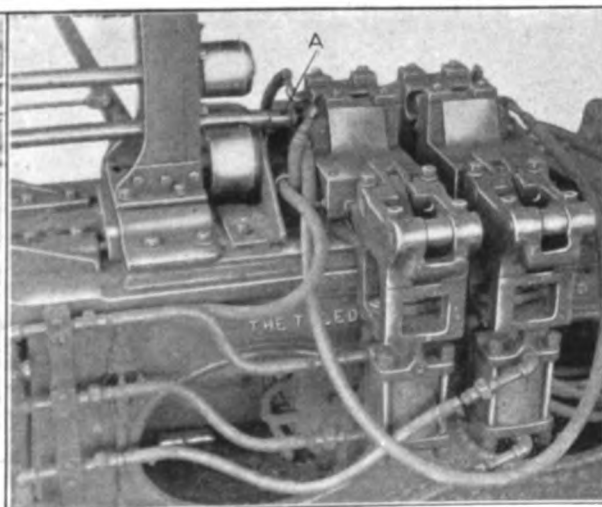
MACHINE EMPTY, SHOWING THE INSIDE
